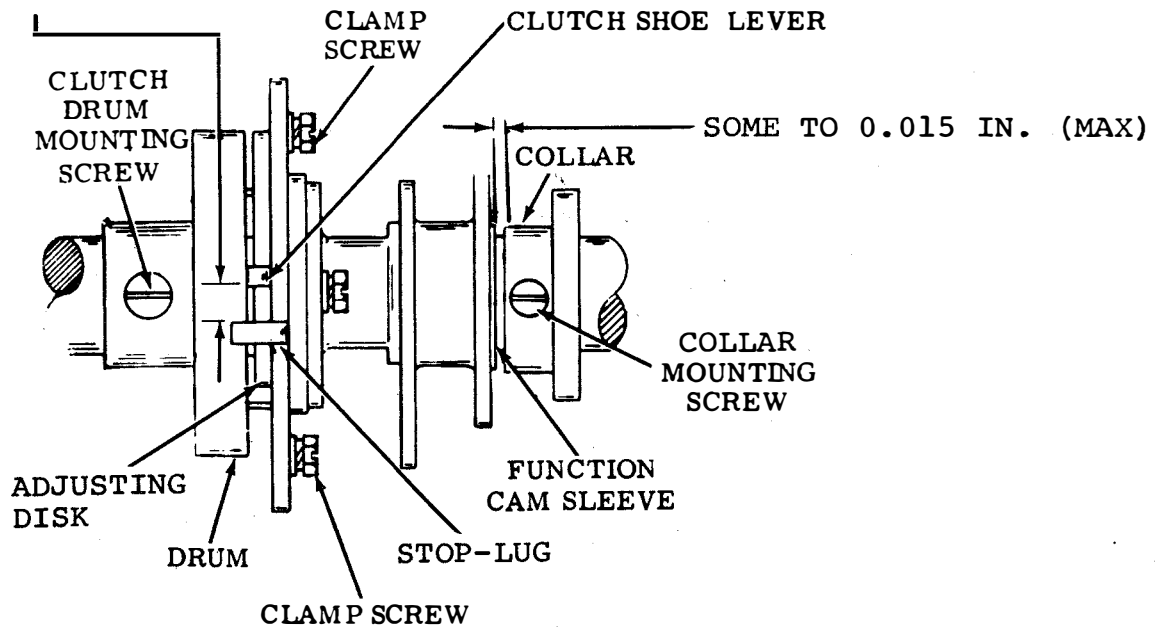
Function Clutch Shoe Lever and Clutch Drum End Play for One-Shaft Units, Right Side View
